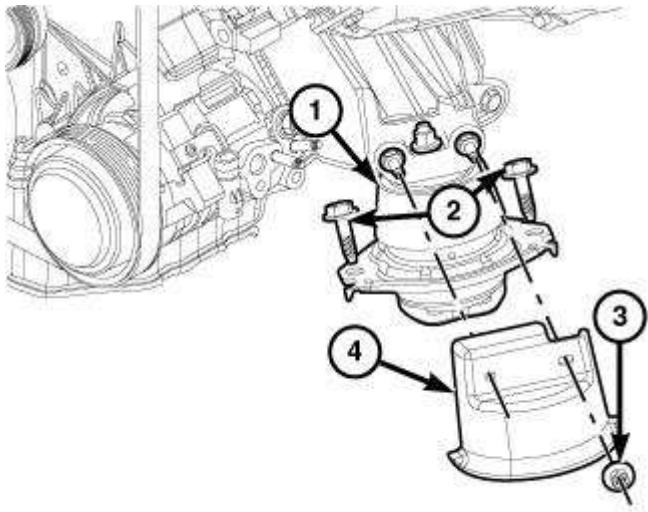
Engine Mount Heat Shield Retaining Nuts, Lower Mount Retaining Bolts & Heat Shields
